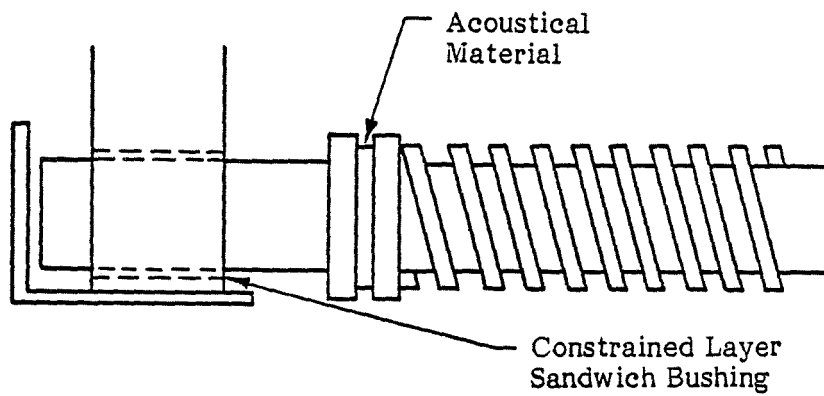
Isolated Tension Spring, Tail Roller Assembly
